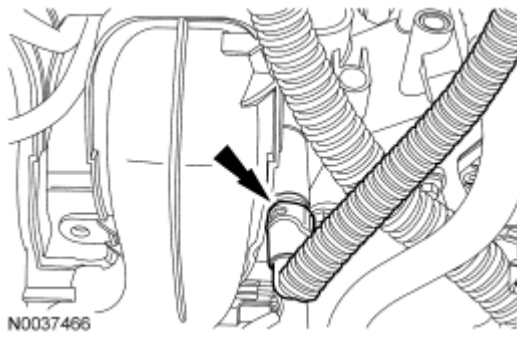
Locating Evaporative Emissions (EVAP) Tube From Intake Manifold
